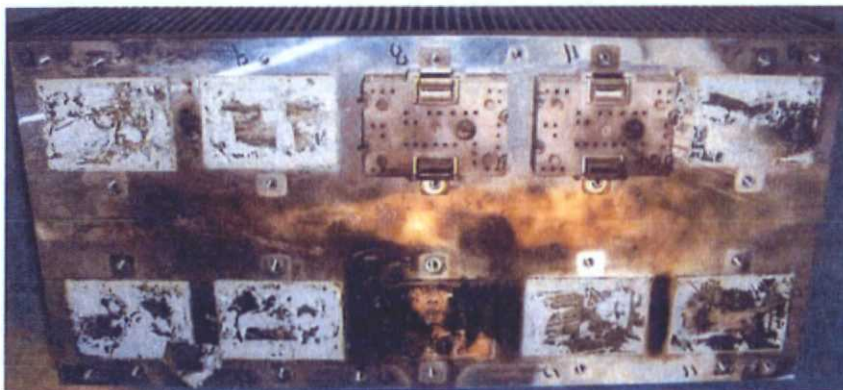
Example of Power Module IGBT Heatsink assembly removed from the Power Module circuit board; The bottom middle IGBT is removed and further analyzed internally in the next figures
